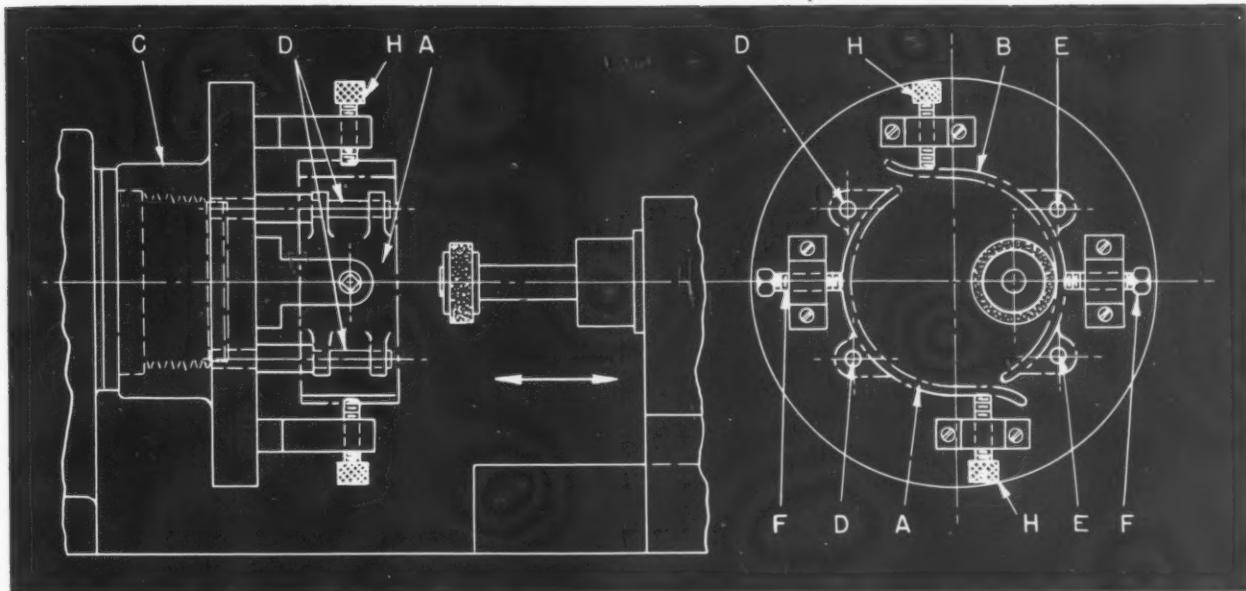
Set-up for simultaneously grinding the inner radial surfaces of two guards, (A) and (B). The work is slowly rotated while the grinding wheel is reciprocated through the "bore"
